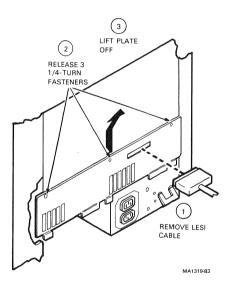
Removing the LESI Cable and Chassis Rear Plate
